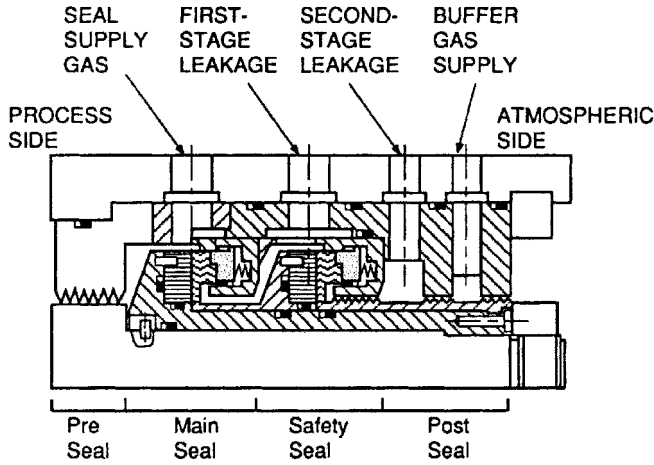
Tandem dry seal configuration. (Revolve Technologies, Calgary, Alberta, Canada)
